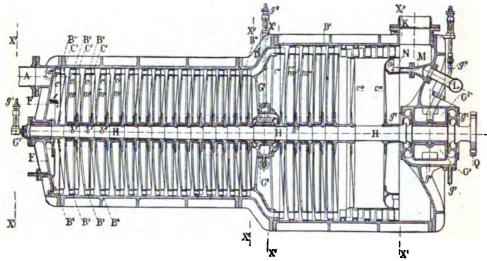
Rateau Turbine, Elevation in Section. (From The Electrical Review.)
